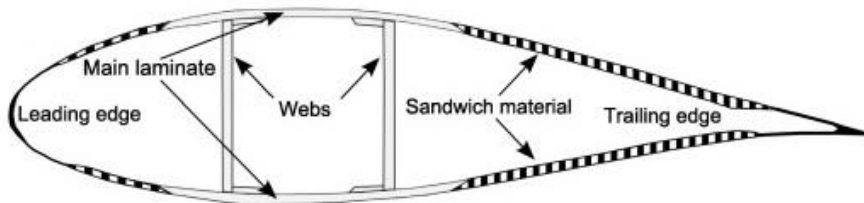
Sketch of cross-section of a wind turbine blade [22]
